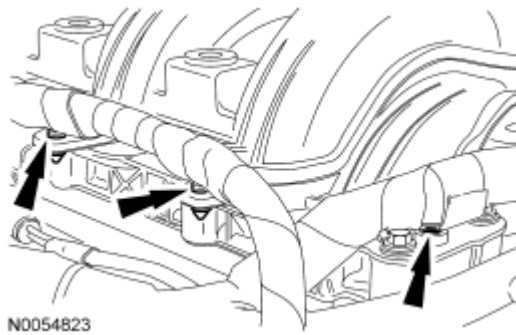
Locating Wiring Harness Retainers From Upper Intake Manifold
